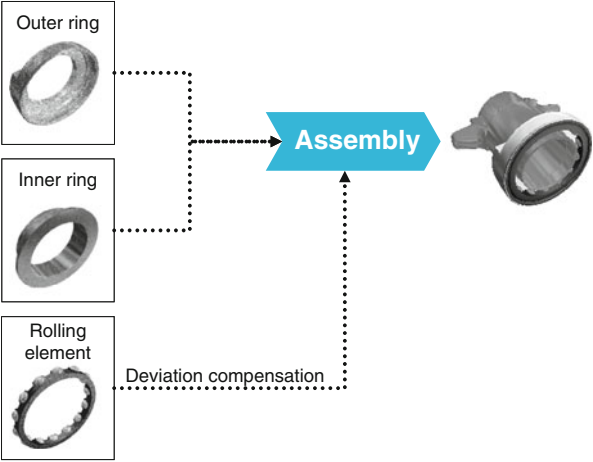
Assembly of a roller bearing by pair-selection by means of rolling elements (e.g.: Clutch release stop). (Schmitt 2000)
